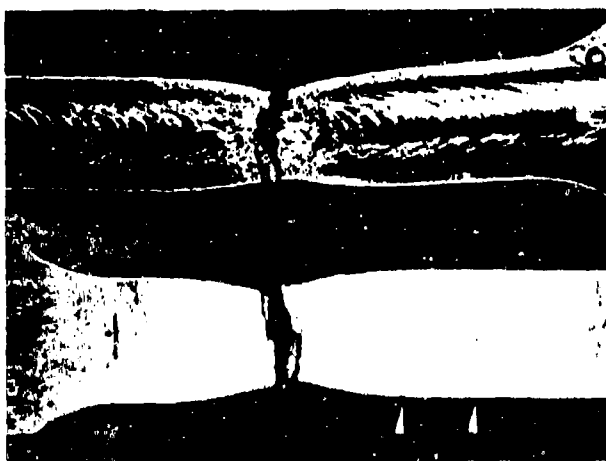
Free-Bend and Tensile Tests in 0.050-in. Ti-15V-3Cr-3Al-3Sn; Solution Heat-Treated, Welded, Then Aged 950°F-4 Hours
